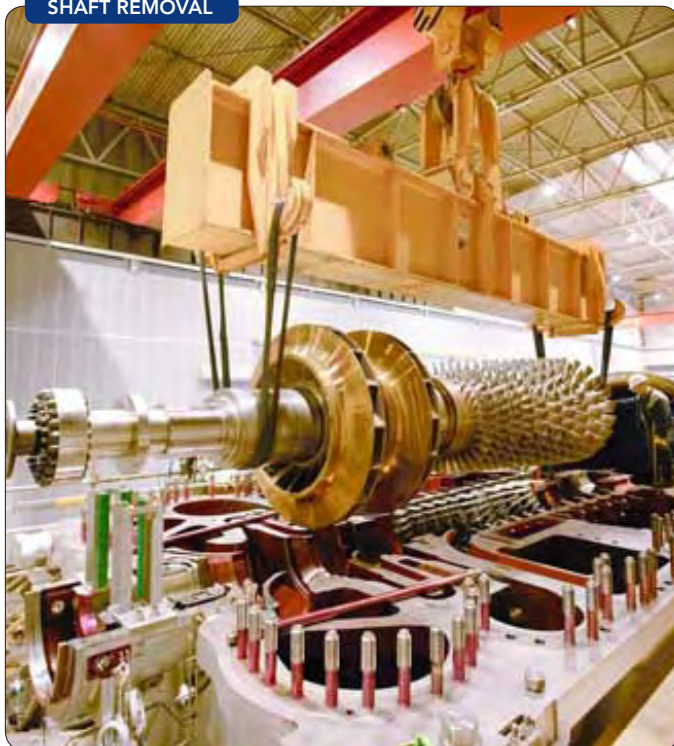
Repair and overhaul of compressor requires taking the main shaft out of the casing. Source: Siemens.
